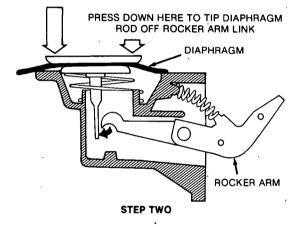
REMOVAL OF J-SERIES DIAPHRAGM ASSEMBLY
